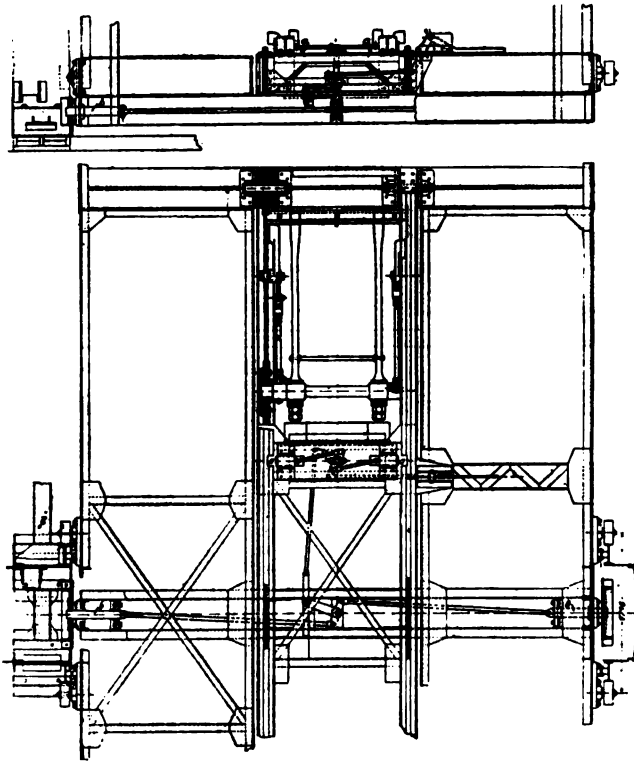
Details of Working Parts of Cradle in Plan and Elevation.
